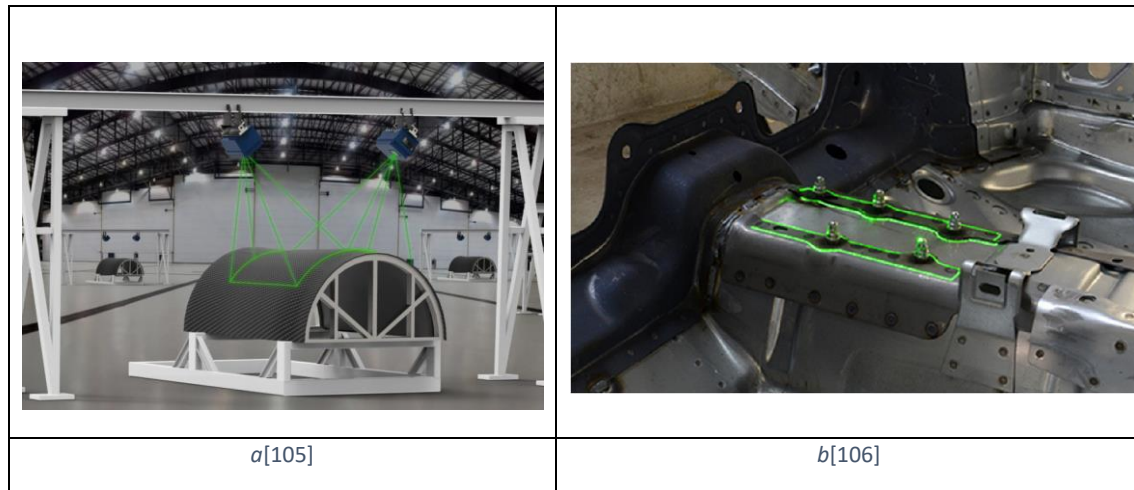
Laser (a) and light pattern (b) projection above the part surface for inspection and assembly tasks.
